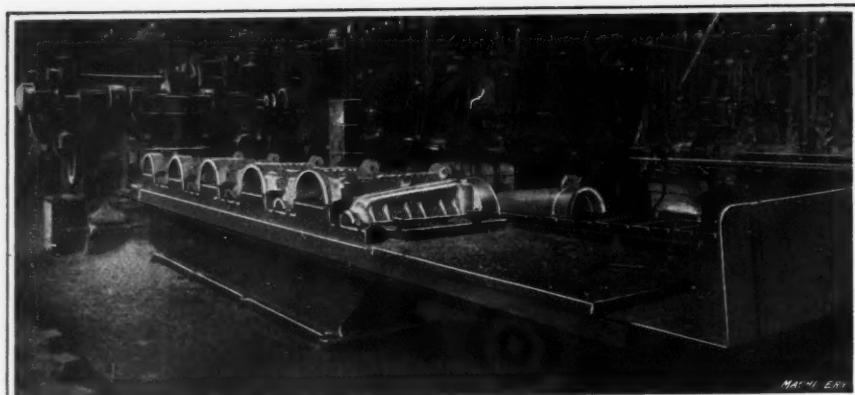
Same Type of Machine as that shown in Fig. 1, but equipped with Fixtures set transversely across Table
